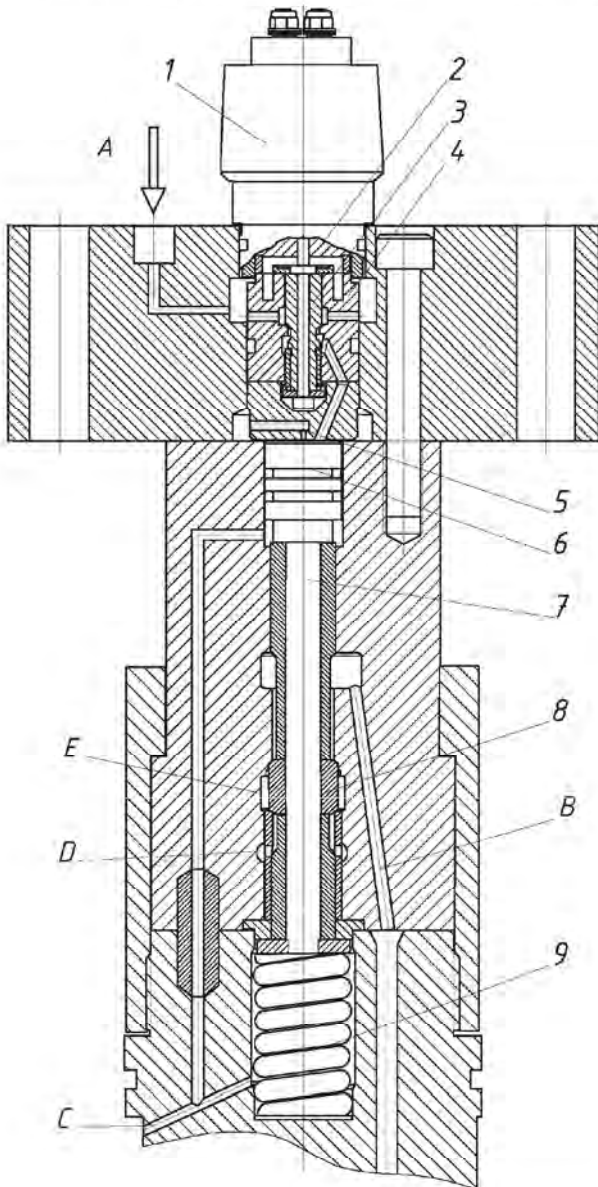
General view of the starting and main valve: 1 – solenoid; 2 – solenoid armature; 3 – start valve; 4 – starting valve housing; 5 – throttle hole; 6 – main valve drive piston; 7 – main valve guide; 8 – main valve; 9 – return spring. A – control oil; B – fuel supply; C – collection of leaks; D – fuel outlet for hydraulic locking of the needle; E – fuel outlet to the nozzle (adapted from [65, 66])
